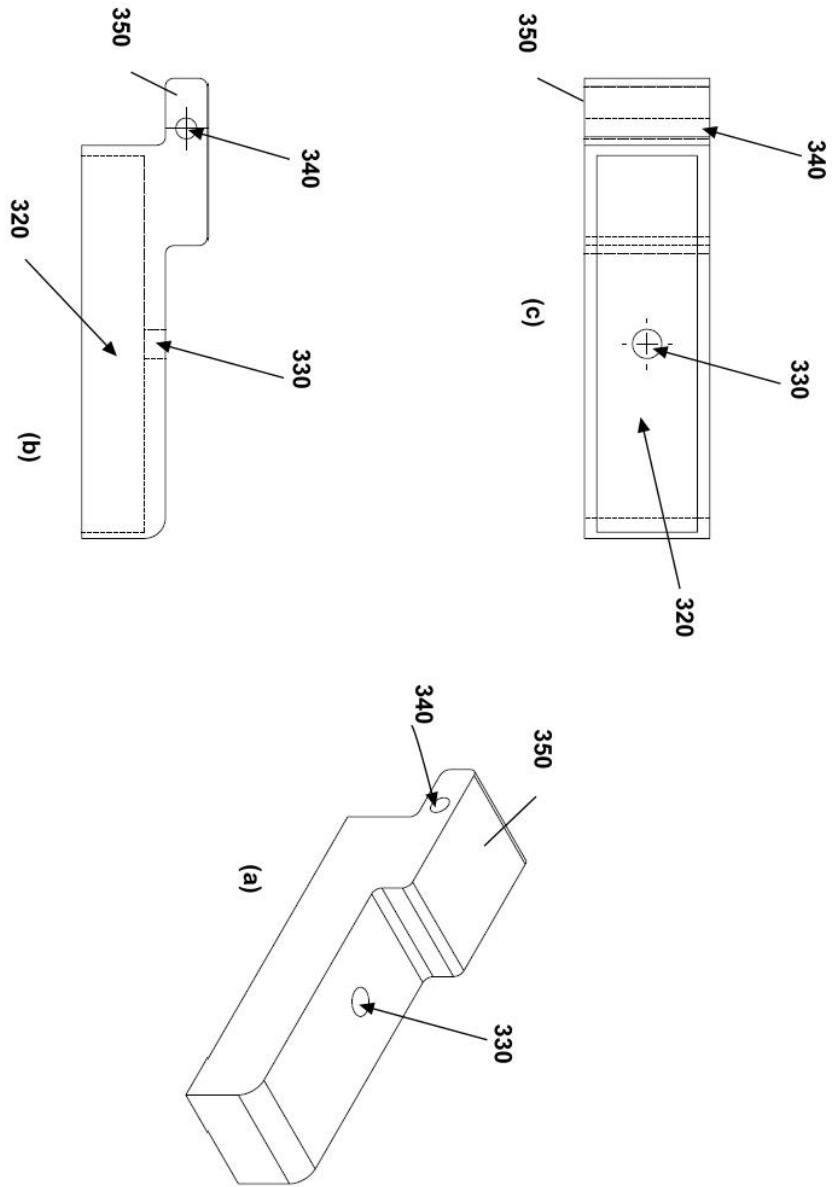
A perspective view (a), a right side view (b) and a plan view from below (c) of the upper diffuser
